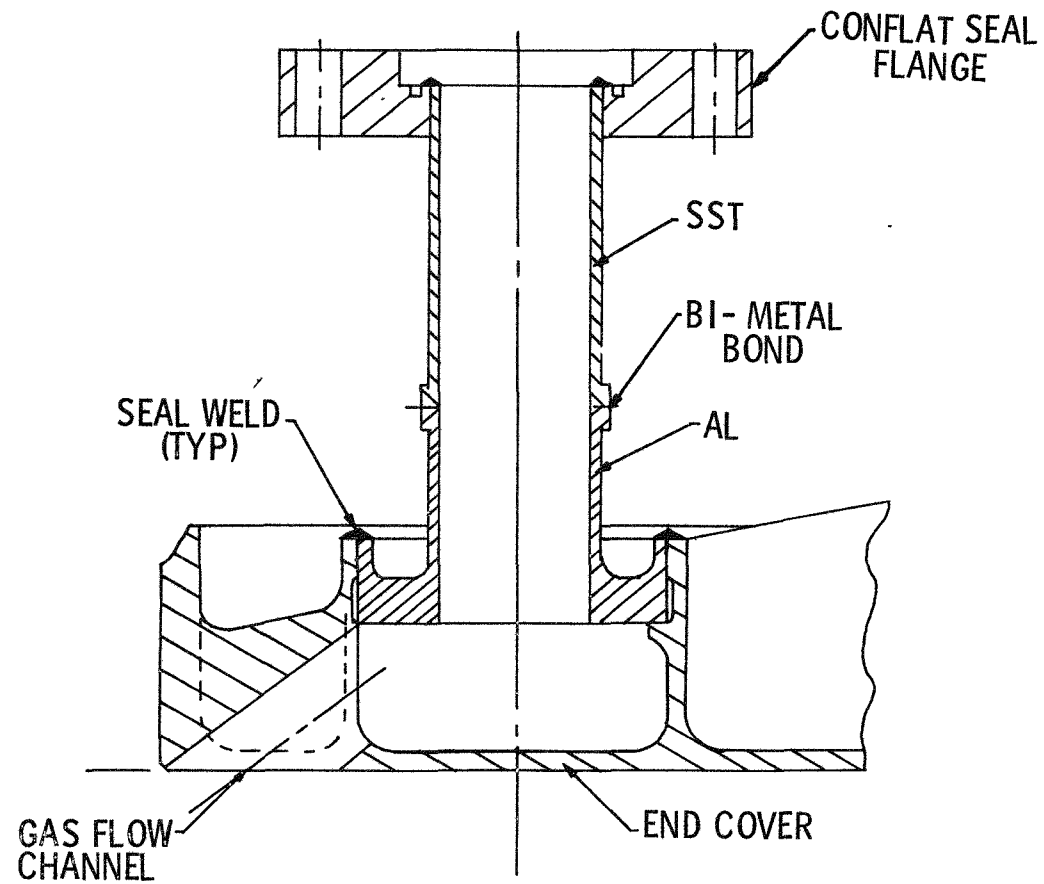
Outgassing Tube Assembly Application of Bimetal Weld Transition Joint to the SIG/Galileo Design
